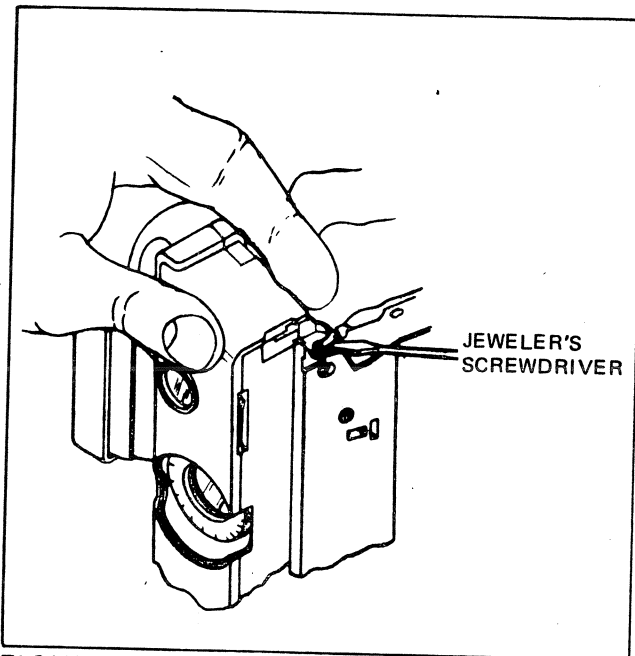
RELEASING SHUTTER MOUNT HINGE BRACKETS
